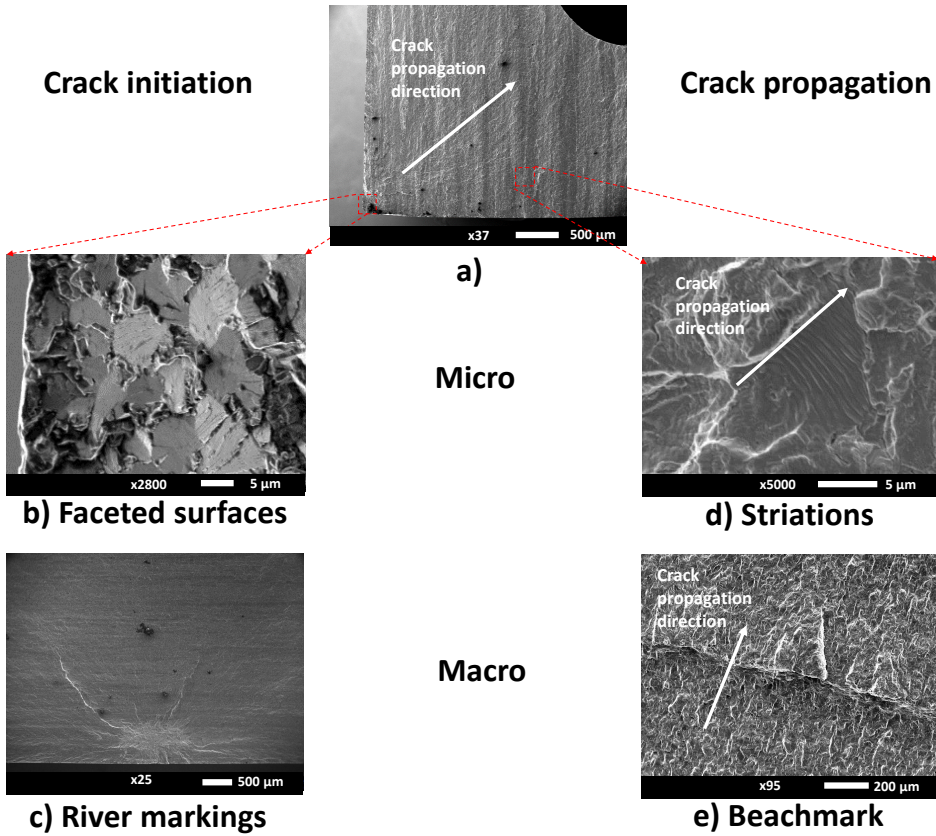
Typical fracture features observed on conventional mill annealed Ti-6Al-4V. a) A fracture surface with crack initiation from the bottom left corner, b) Faceted surfaces, c) River marks, d) Striations and e) Beachmarks
